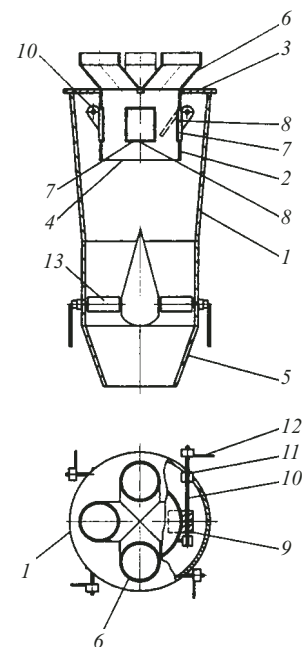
Sketch of the design of the model dust separator for the Cixian thermal power plant: 1, vessel; 2, collector shell; 3, lid; 4, inlet cross section of the collector shell; 5, inlet pipe; 6, outlet pipes; 7, window in the collector shell; 8, rotatable insert; 9, bracket; 10, axis of insert; 11, bushing; 12, lever; 13, axial blade swirler.
